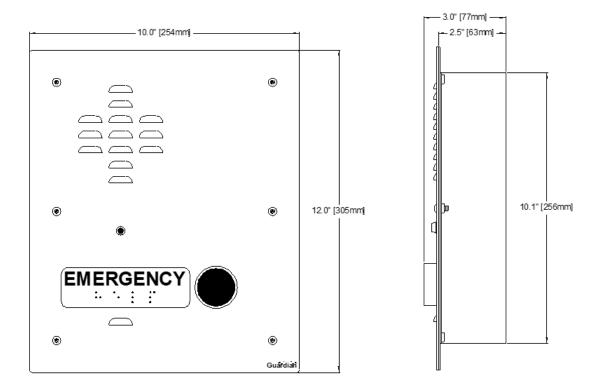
HDE-11-VoIP & HDE-1100-VoIP Dimensions
